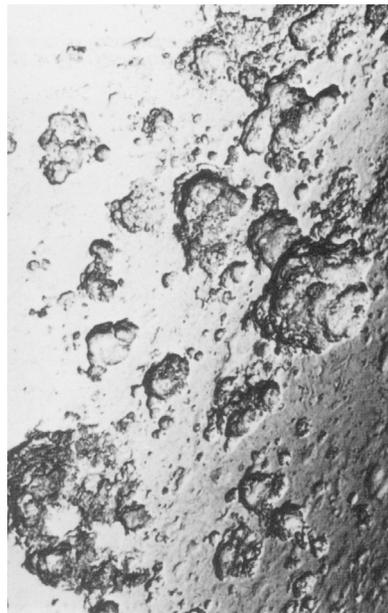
Pitting Corrosion on Compressor Blading.
